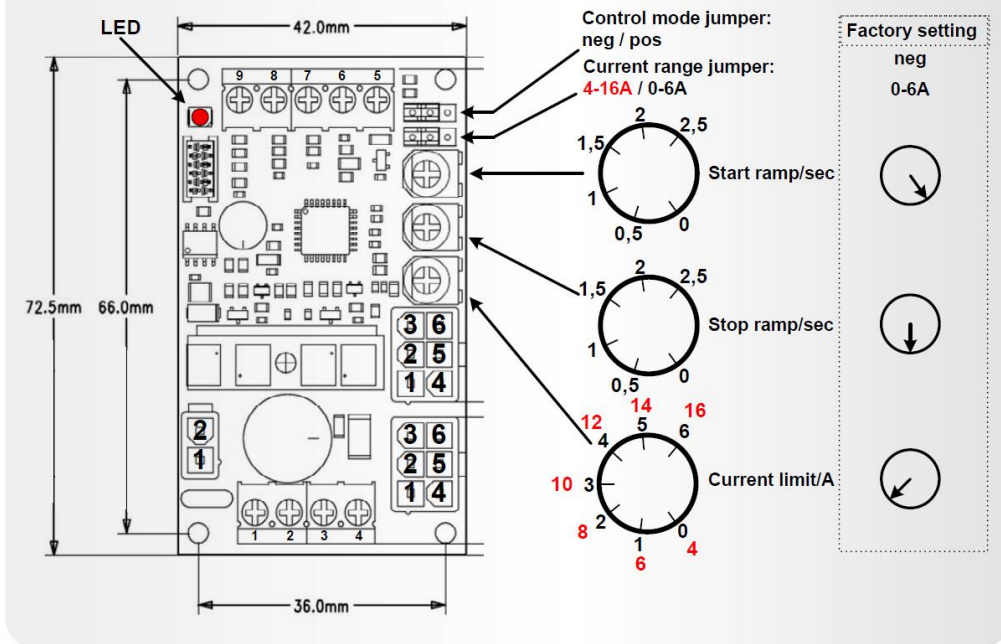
SETTINGS AND MECHANICAL DIMENSIONS
